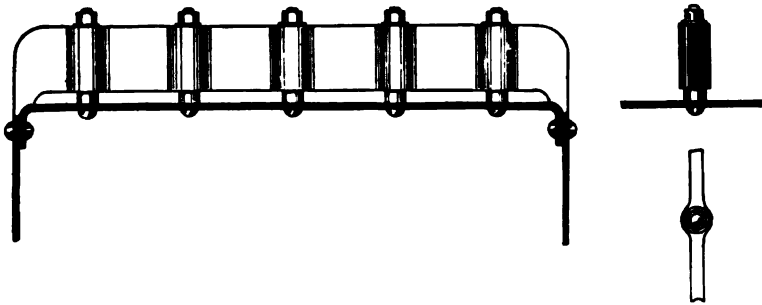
Girder Stay for Supporting Crown-sheet.
